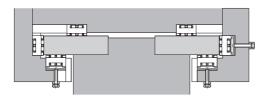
Methods for Adjusting the Clearance of the LM Roller
